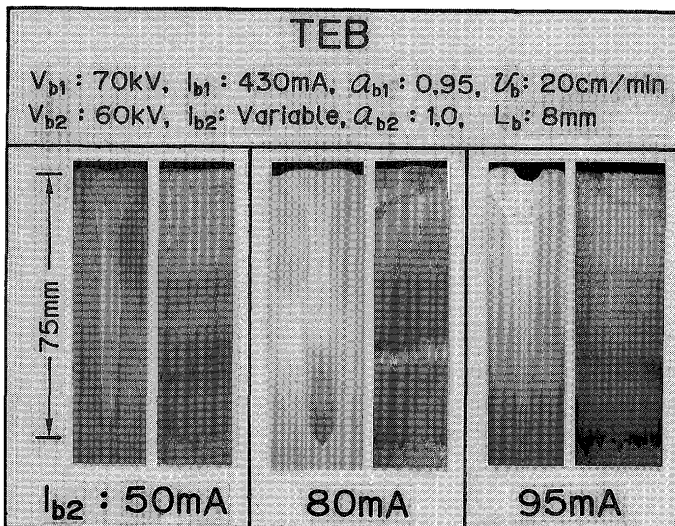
Longitudinal and cross sections of TEB welding bead at various second beam powers
